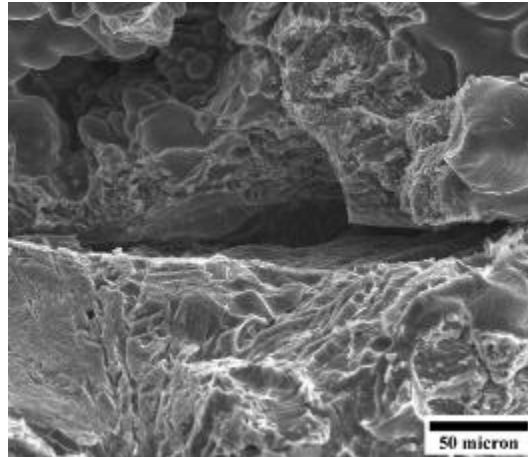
SEM fractograph of specimen after tensile test, prepared from part 4 of die cast plate.
